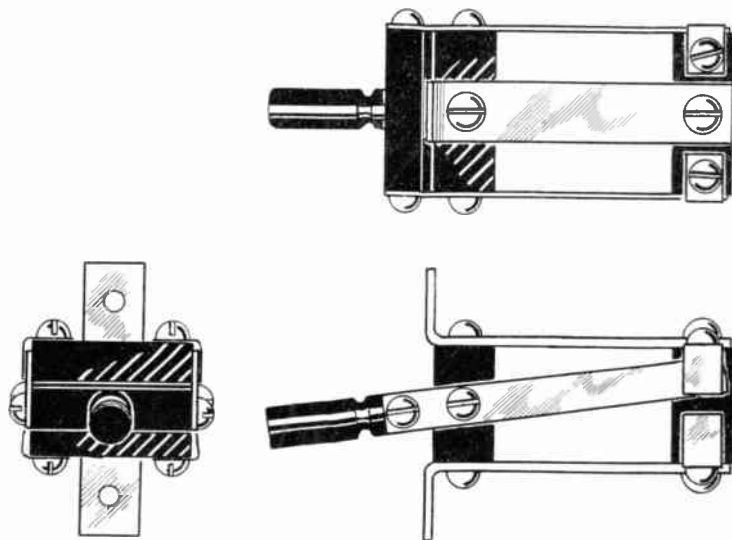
This switch may be mounted at the inside of a panel or beneath the operating table.
